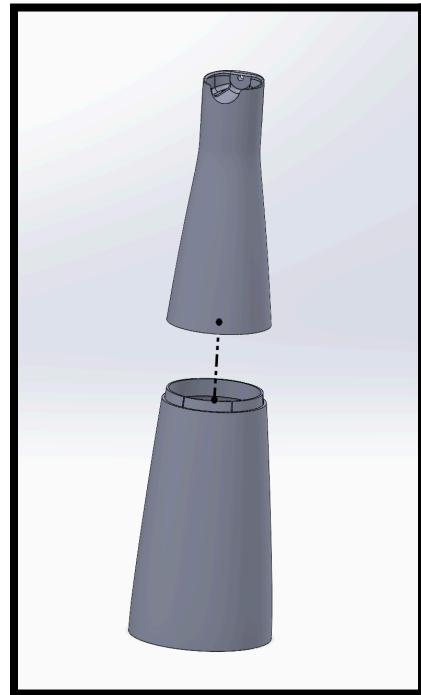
Exploded view of the two-part tower assembly, designed to meet 3D printer size constraints with aligning and bonding features to assist during gluing.
